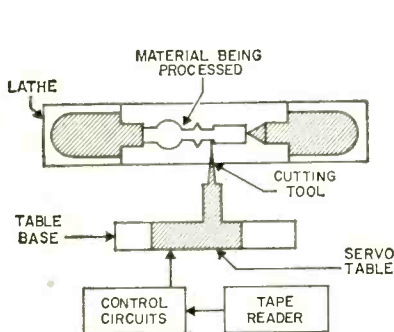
Tape system controls a lathe shaping a metal or wood rod.
